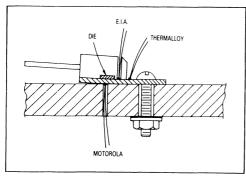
JEDEC TO-220 PACKAGE MOUNTED TO HEATSINK SHOWING VARIOUS THERMOCOUPLE LOCATIONS AND LIFTING CAUSED BY PRESSURE AT ONE END
